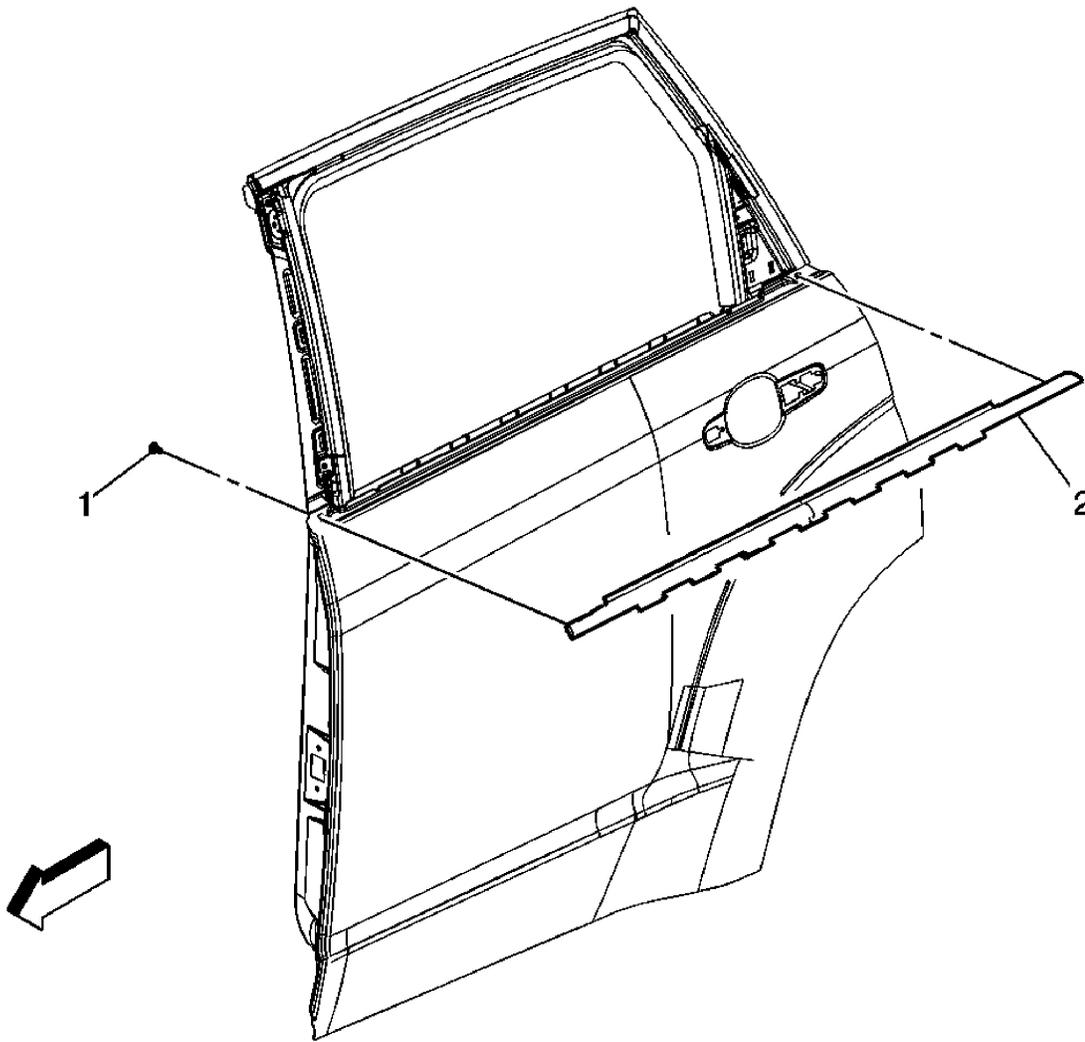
View Of Rear Door Window Belt Inner Sealing Strip
